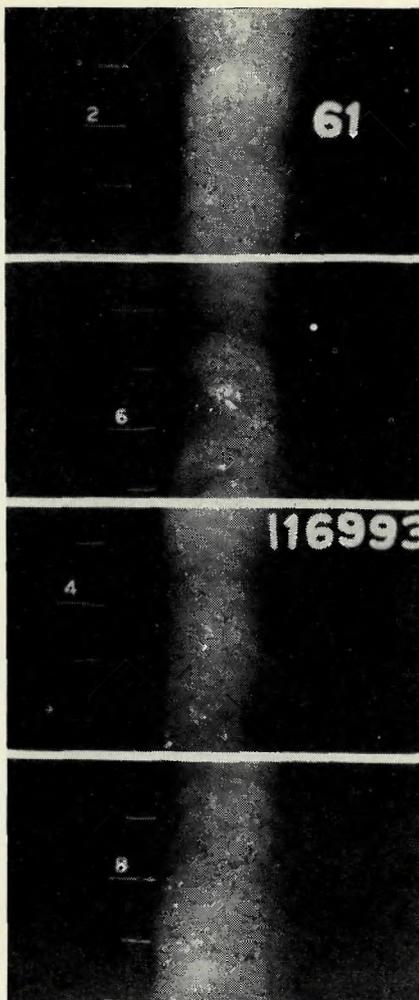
Radiographic image of a 4043 weld in a 7/8-in. thick 6061-T651 panel welded with the gas tungsten-arc method
